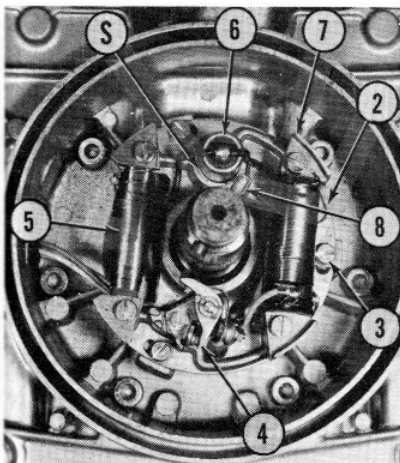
Installed view of energy transfer magneto plate with flywheel removed, showing component parts. Refer to Fig. 10 for parts identification.
